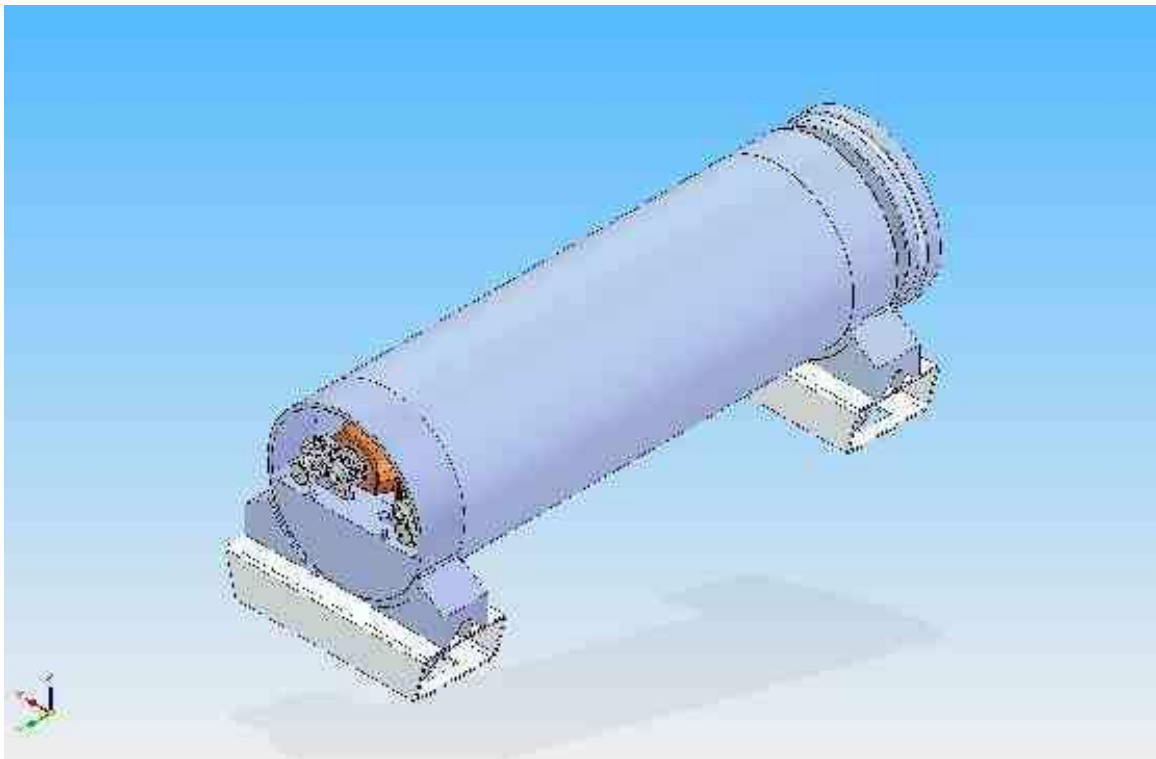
Full layout of the rotatable collimator the end flanges (not shown) are quickly removable for easy access.
